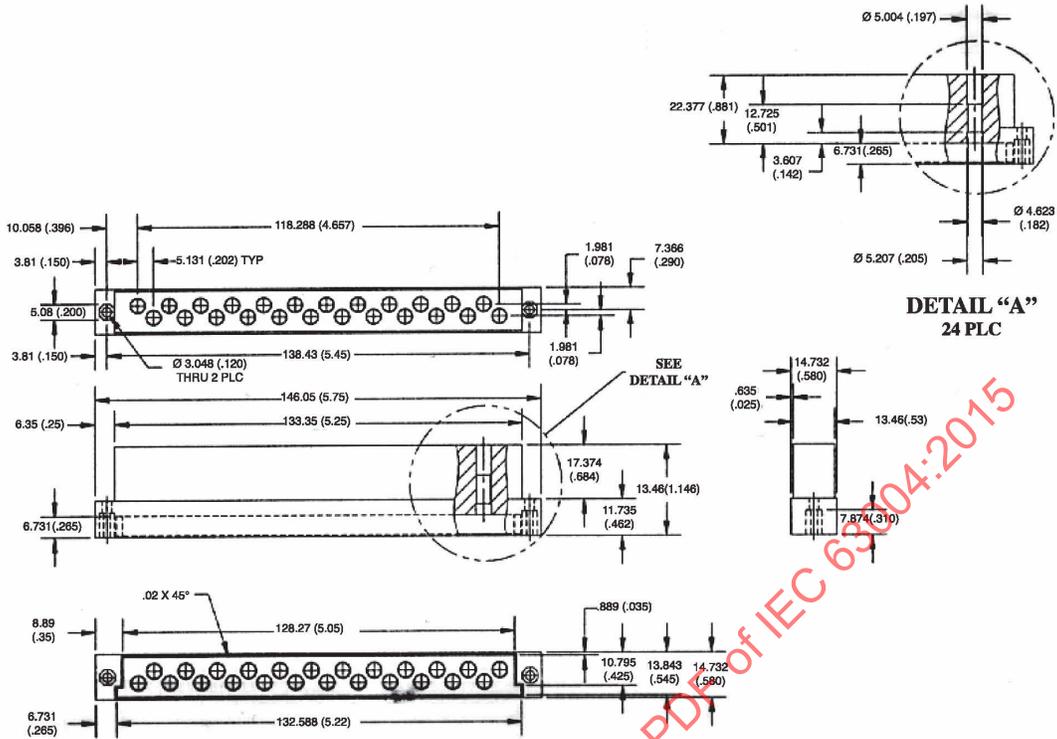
Universal size 8 D-Sub compatible module connector, 24 position, receiver housing physical layout
